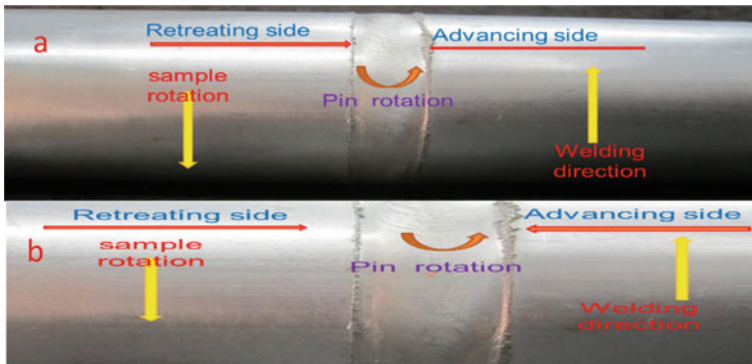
Finished pipe a Slight weld flash on trailing edge that has exhibited better-quality welds at 1800 rpm, b excessive weld flash on trailing edge at 485 rpm
